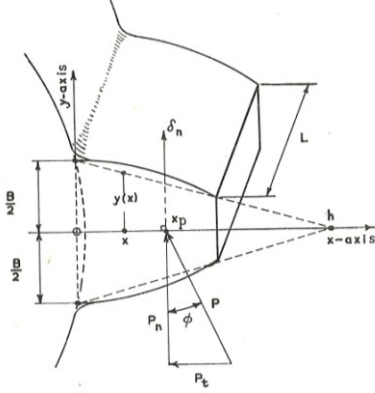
Gear tooth geometry and approximations. (Nestorides, 1958)
